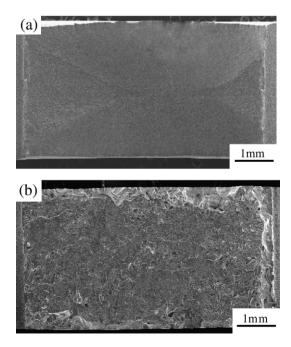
Macroscopic fracture appearance of SP-700 specimens after notched tensile tests: (a) mill-annealed material; and (b) 482 °C-aged weld.
